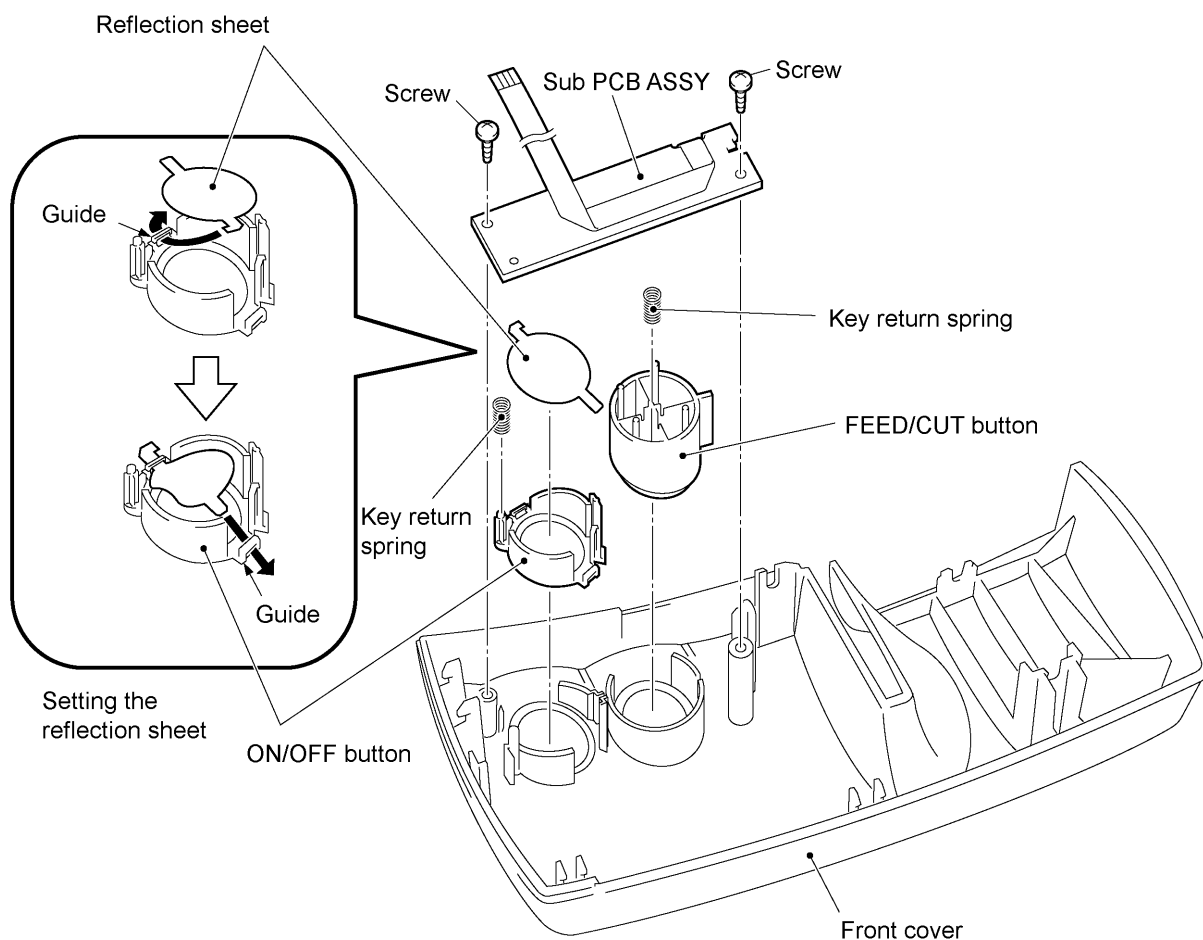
Installing the ON/OFF Button, FEED/CUT Button, and Sub PCB ASSY
